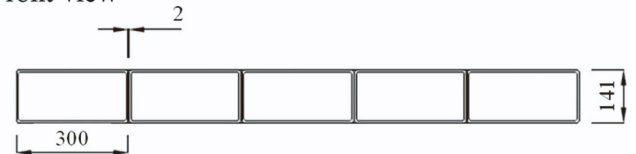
Impact sound pressure level test specimen geometry – homogeneous-core sandwich panel (in mm).
